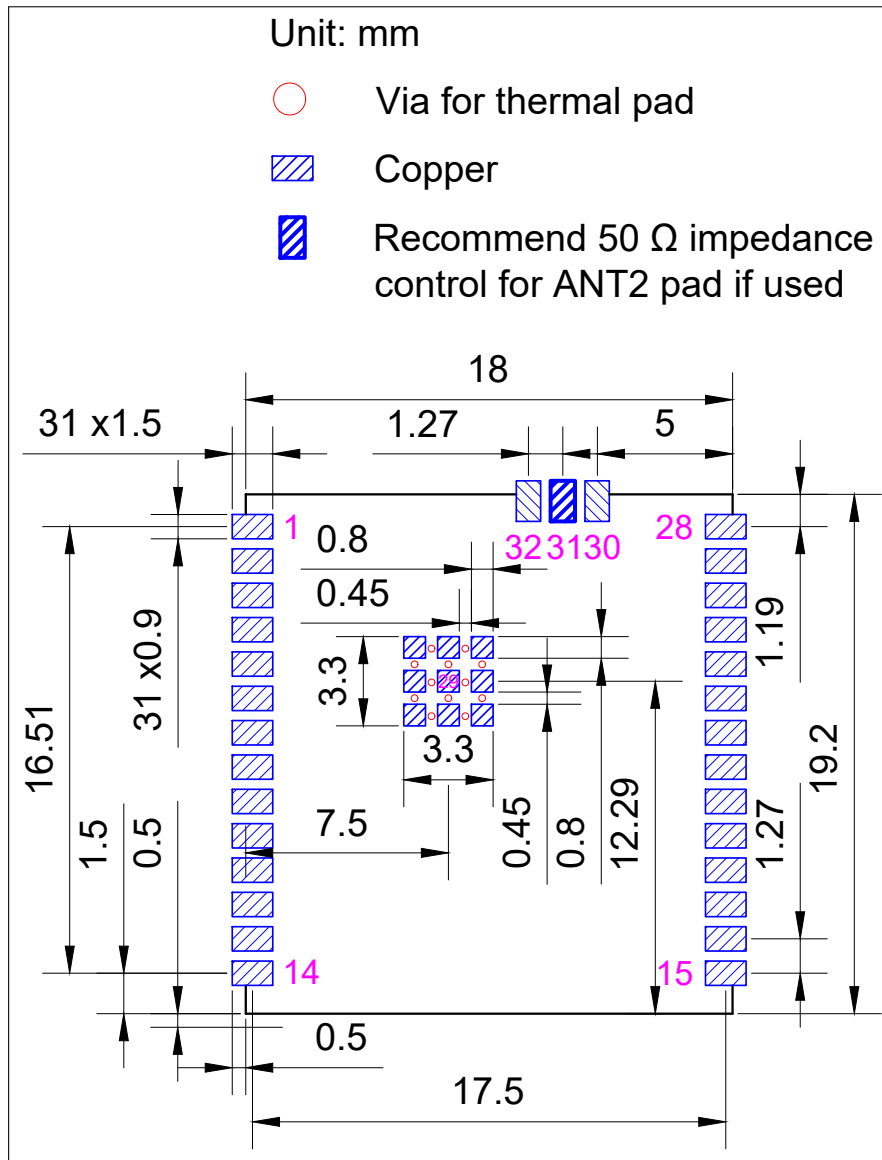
ESP32-C61-WROOM-1U Recommended PCB Land Pattern
